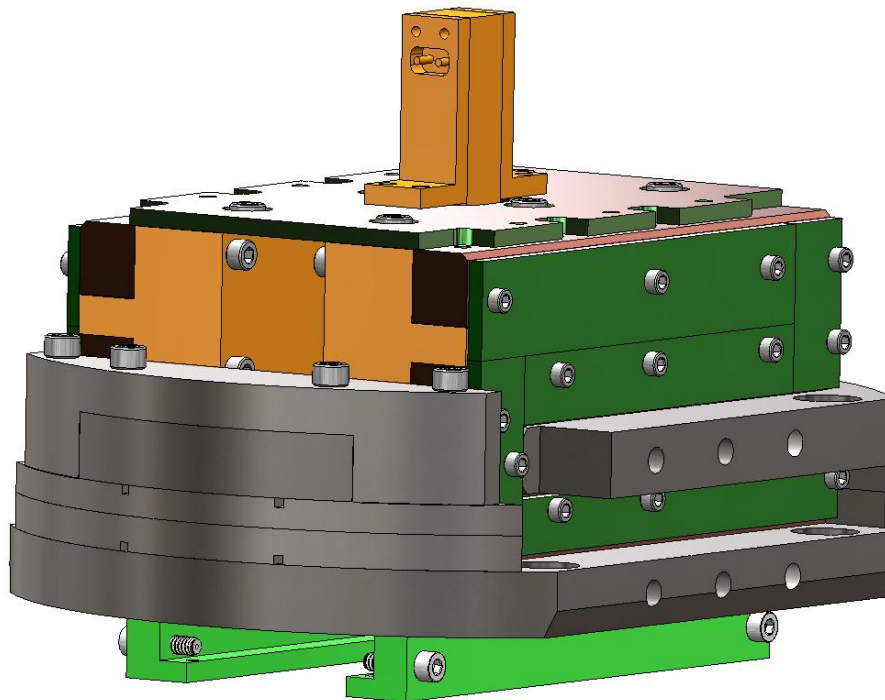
Final Experimental Assembly with extensometer attached to the top plate.
